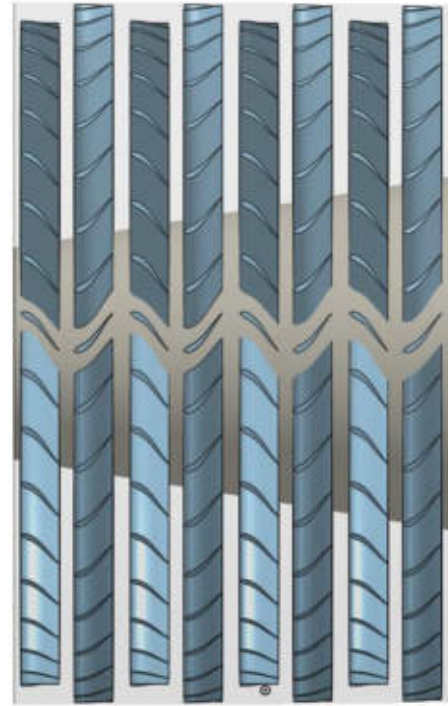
View of Stator /Rotor Design Assembly (inlet at left)
